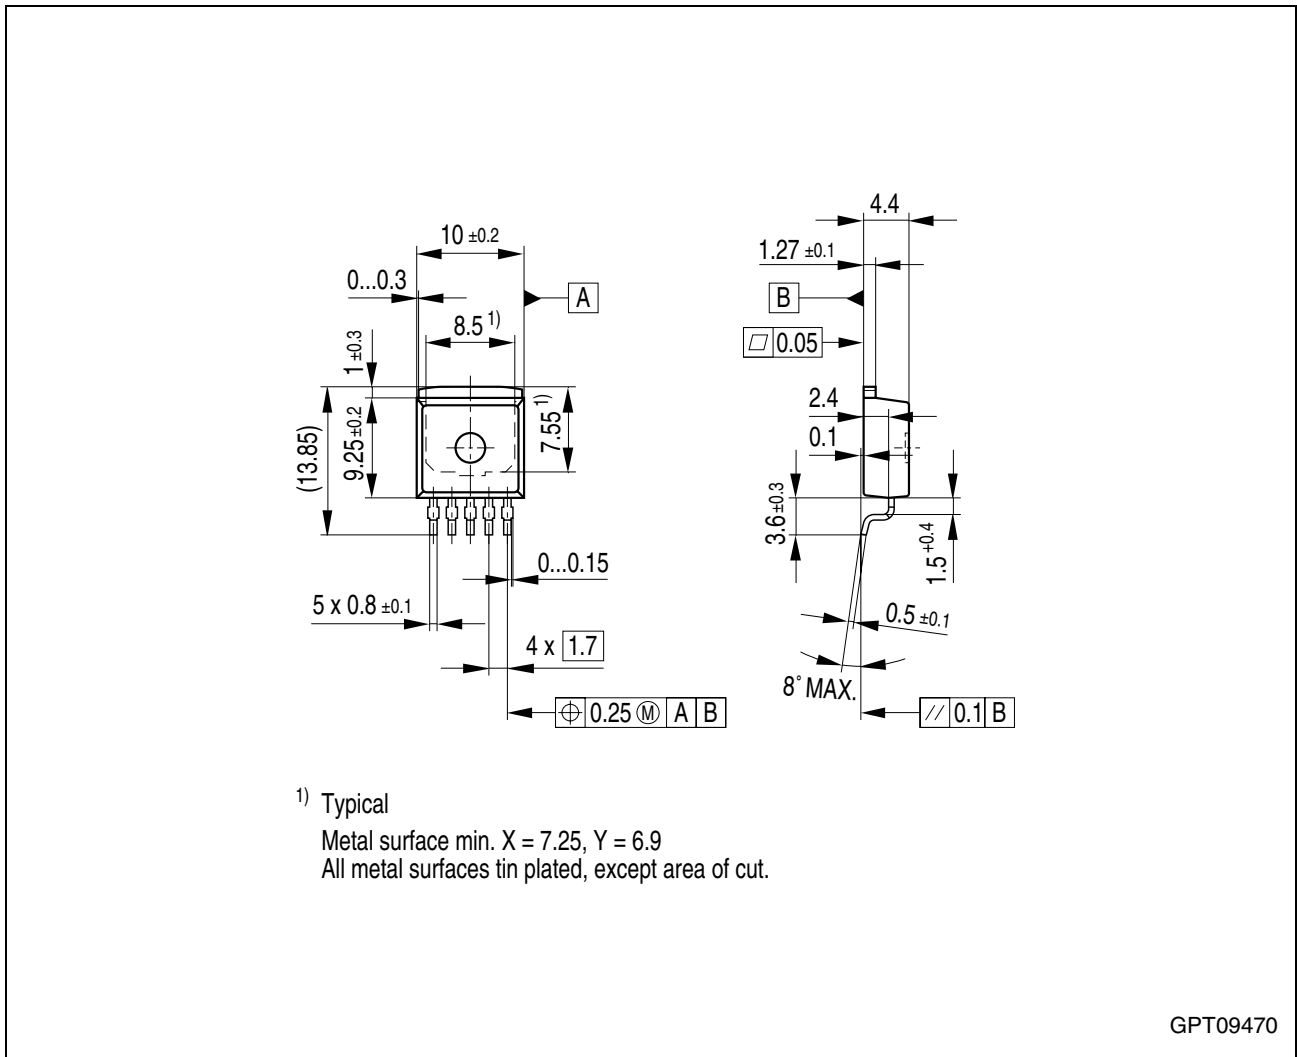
P-TO220-5-122 (Plastic Transistor Single Outline)
